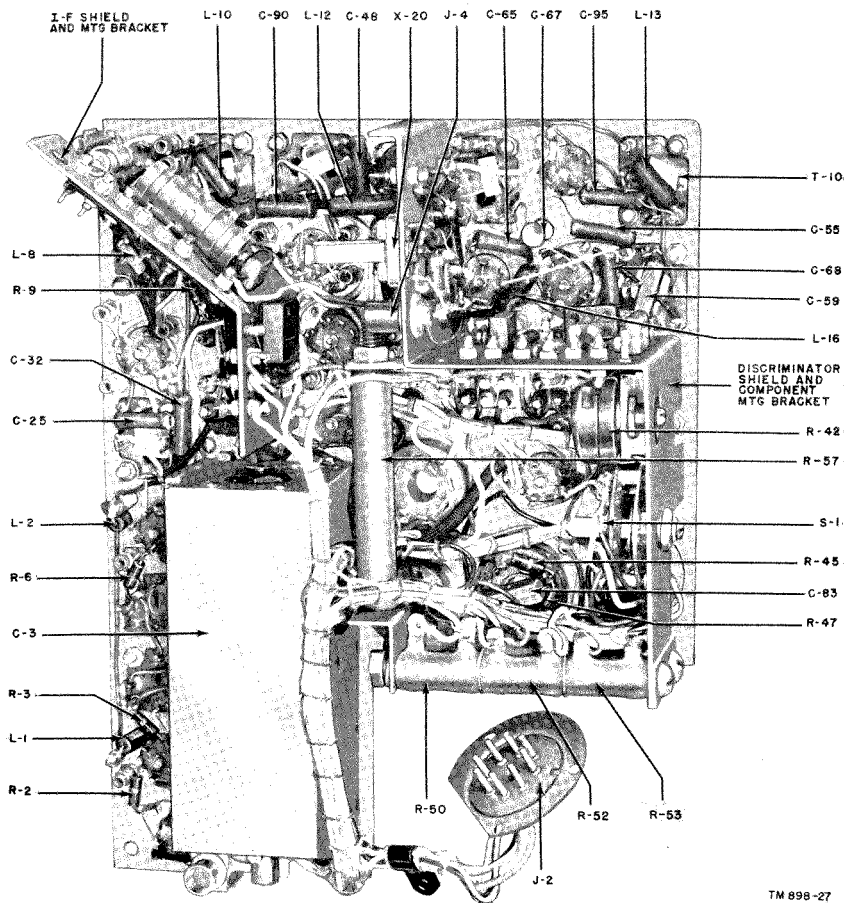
Receiver chassis, bottom view of bottom and side edges.
